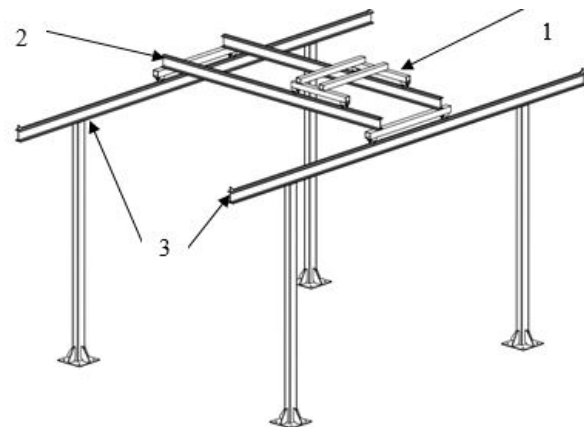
Design model of the bridge crane (1 – carts winch, 2 – bridge, 3 – girders of the bridge).
